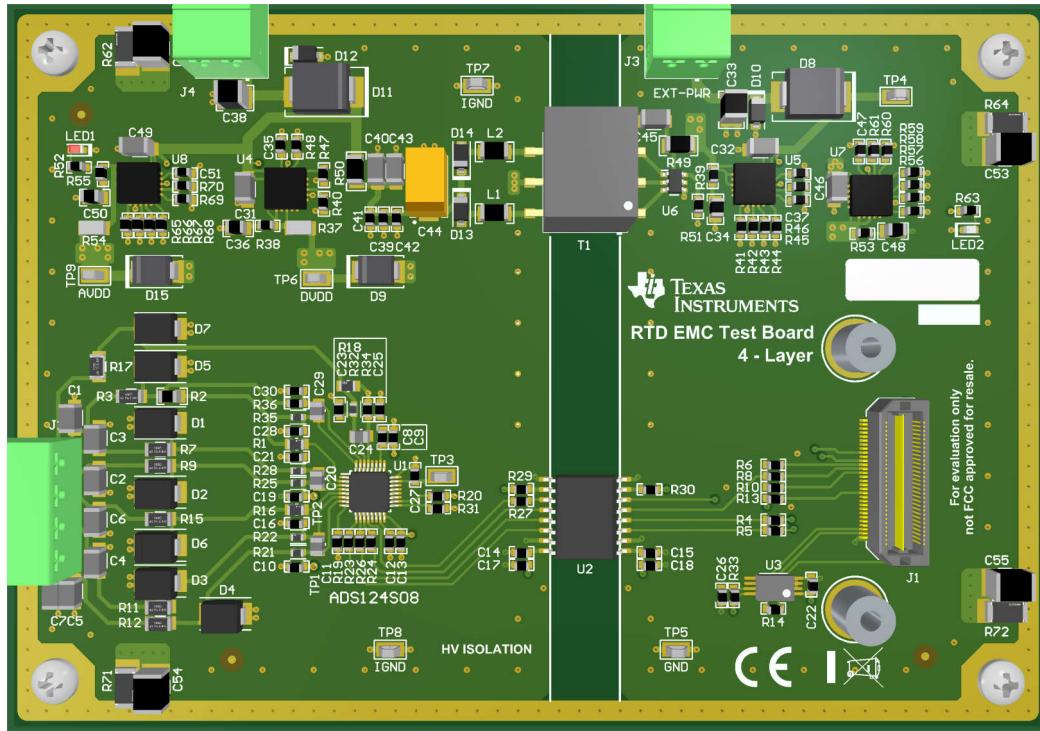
RTD EMC Test Board with ADS124S08 (4-Layer)
